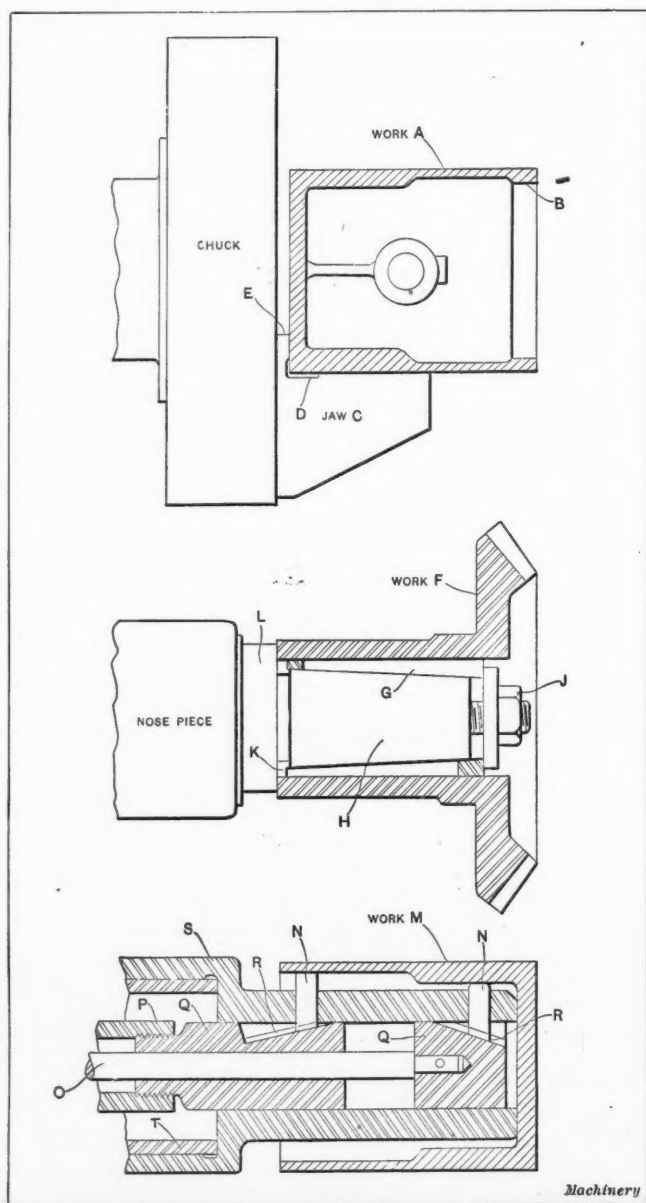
Methods of holding Work in Horizontal Chucking Machines, showing Means for guarding against Chips
